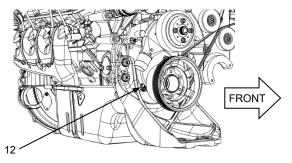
Crankshaft Position (CKP) Sensor connector (12)
